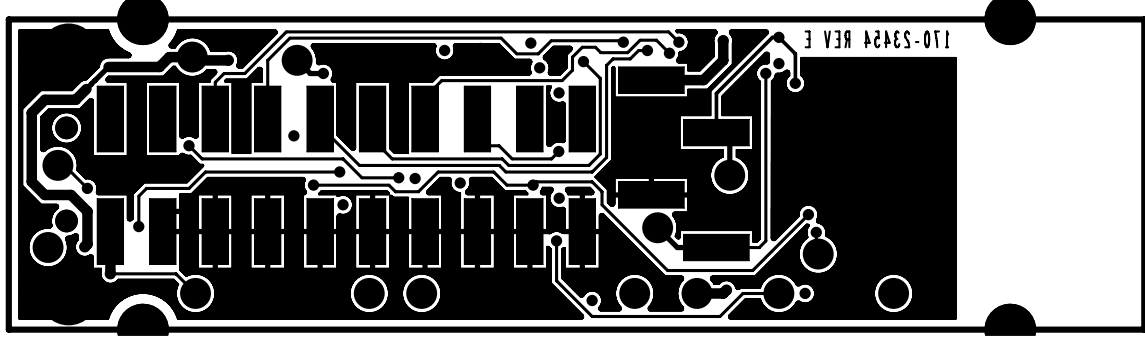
1322x USB Dongle PCB Layout (Bottom View)
